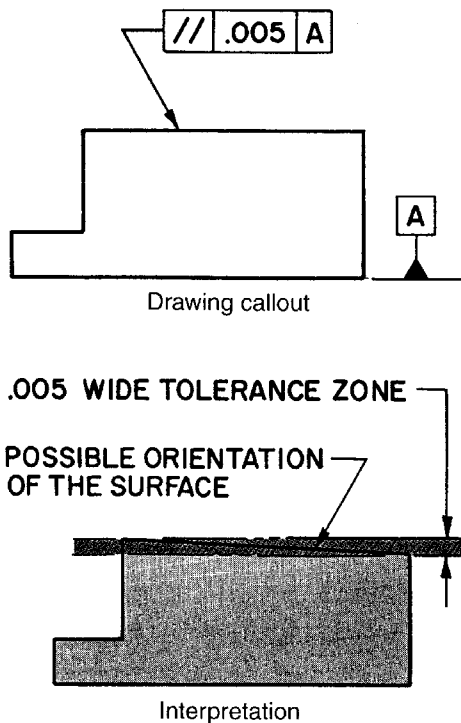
A parallelism geometric tolerance is a tolerance zone defined by two lines parallel to a datum within which the elements of a surface or axis must lie.
